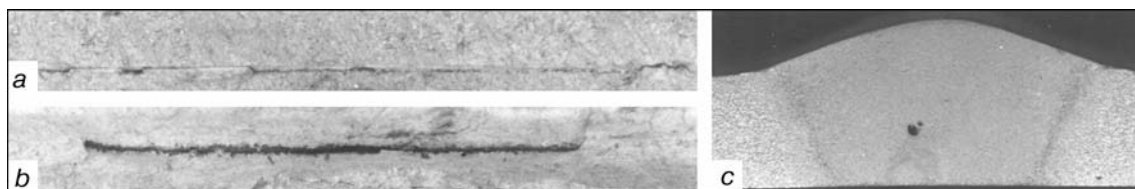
Extended thread-like inclusions of oxide film in fractures of welds (*a*, *b*) and in transverse macrosection (*c*) formed in argon-arc non-consumable welding of Li-containing aluminium alloys
